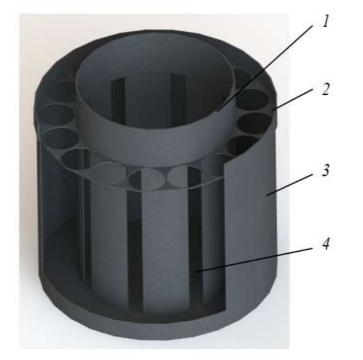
Three-dimensional model of centrifugal separator with coaxially arranged pipes: *1* - inlet pipe, *2* - ring with holes, *3* - housing of centrifugal separator, *4* - slots
